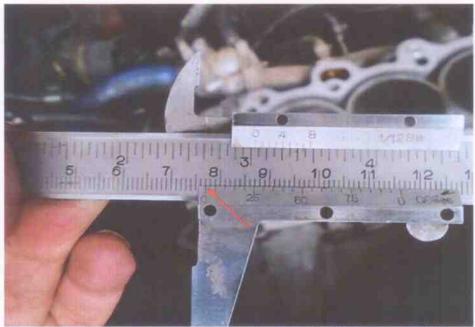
shows the stroke measurement of cylinder 2, which was recorded to be 77.00mm.
